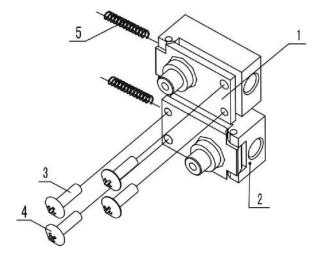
(1) Driven Wheel Seat (Adjusting Block), (2) Driven Wheel Seat (Adjusting Block), (3)/(4) Adjusting Screws, (5) Springs
